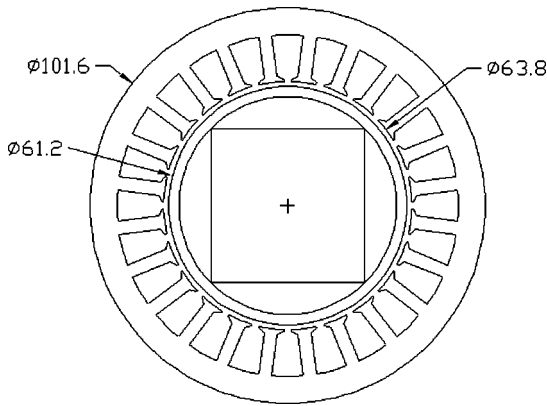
The cross section of a 120 kW alternator (unit is in mm)
